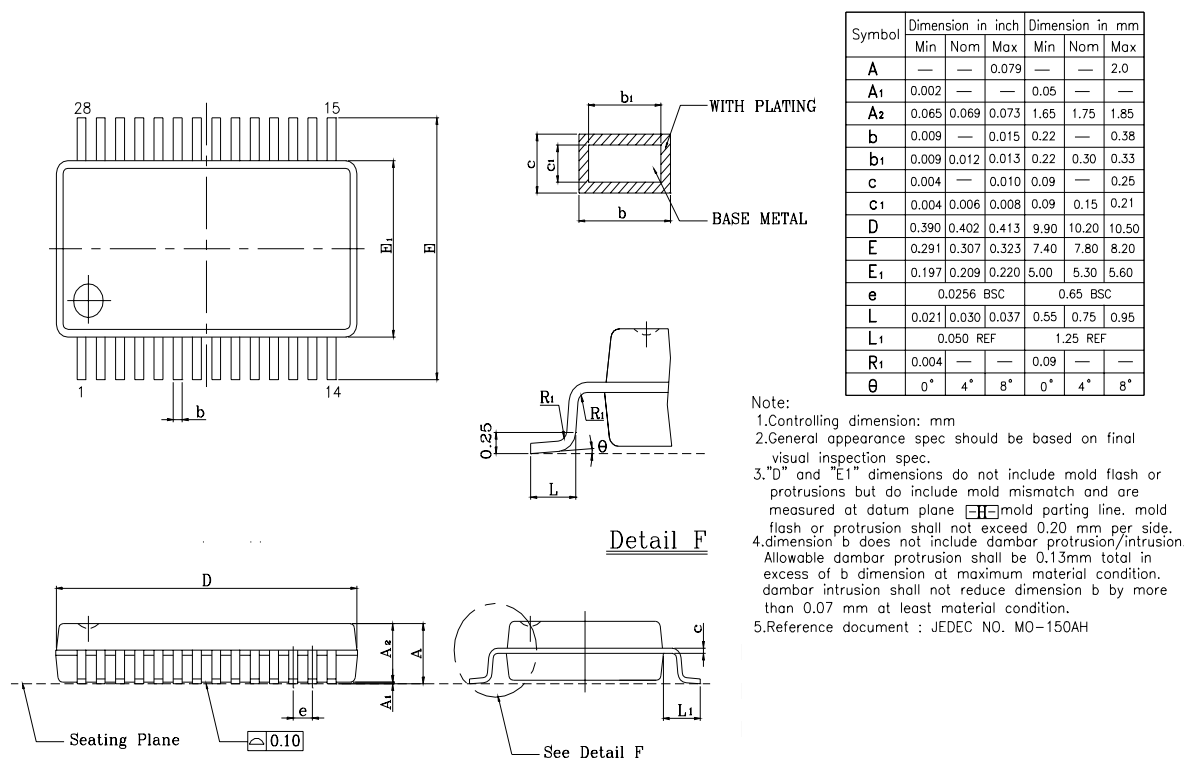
STIr4200S 28-Pin SSOP Pin Assignment Drawing
